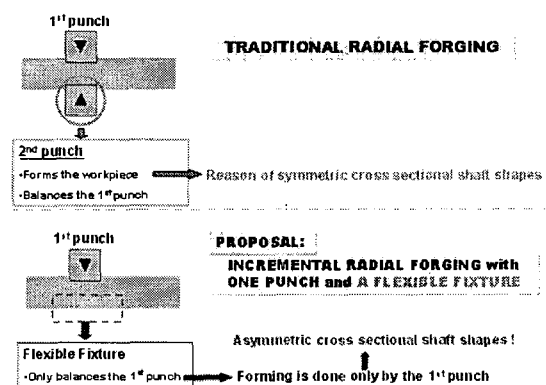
Concept of radial forging with one shaft and a flexible fixture
